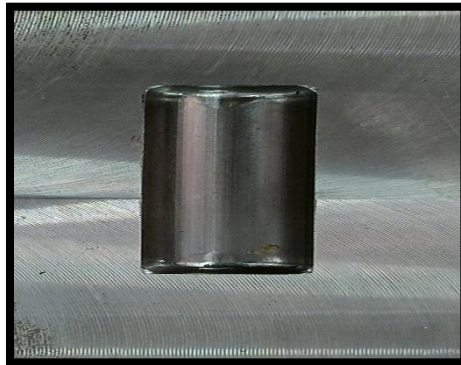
Compression Specimen Mould According to ASTM E-9 Standards.
